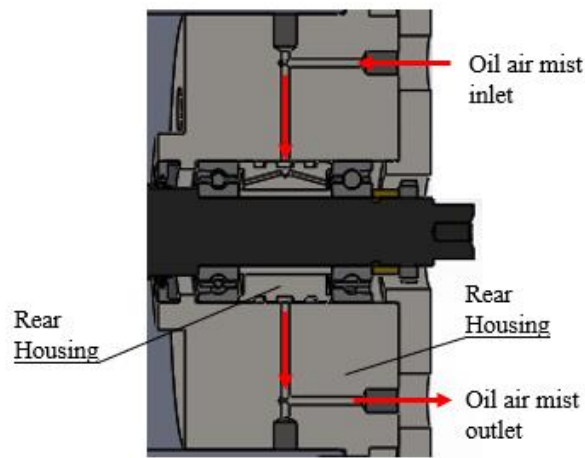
Lubrication system for rear bearings of HSPM generator
